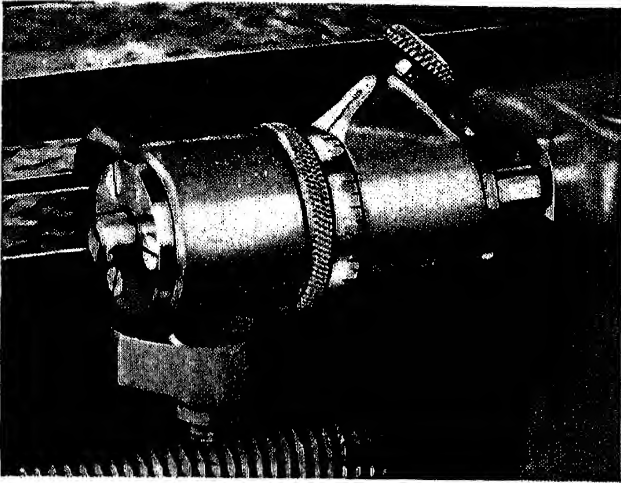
A micrometer carriage stop. (Courtesy South Bend Lathe Works.)
